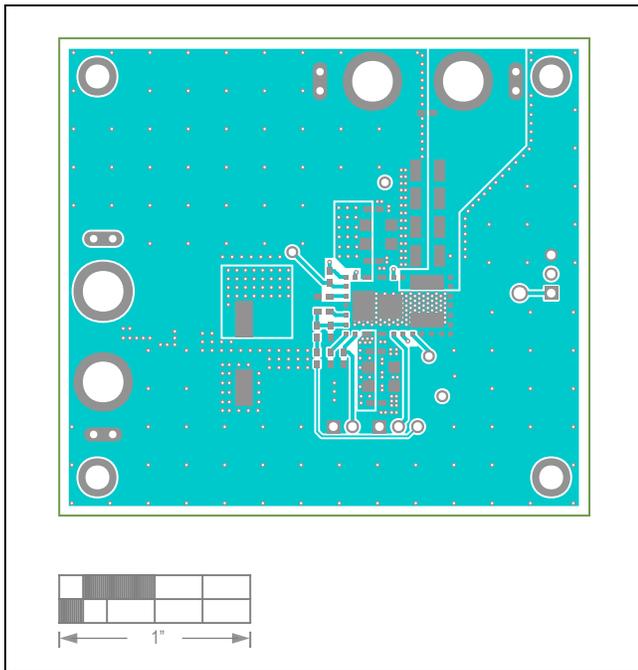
MAXM17536 5V Output EV Kit PCB Layout—Top Layer
